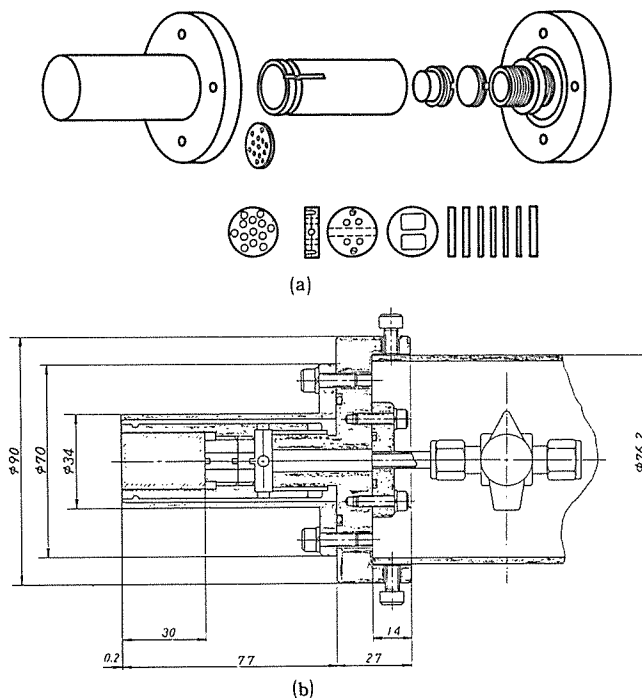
Schematic disassembled view of the vacuum irradiation chamber (a), and its real dimension (b).
